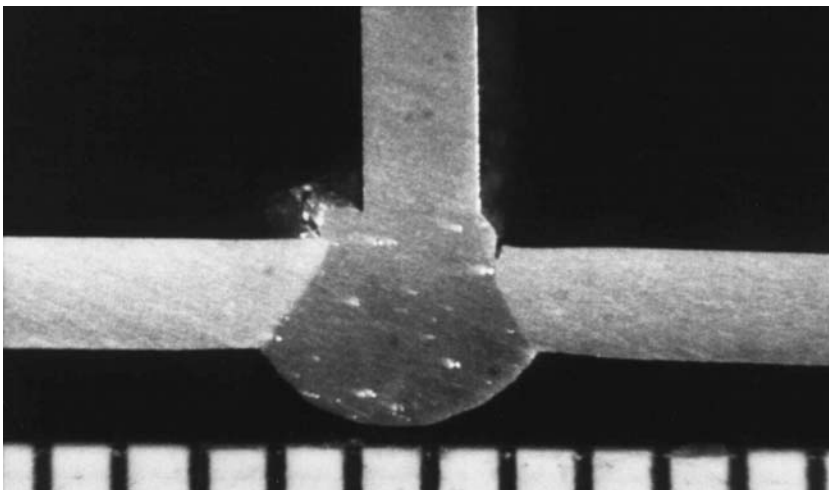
A close-up view of the optimized MIG welding result. The penetration is sufficient, however some burrs can be seen in the opposite side of the weld. Slight gas pores in the weld or tiny misalignment of the arc (to the left) do not essentially affect the reliability of the weld but should be taken into account when comparing the electrical properties of the joint [10].
